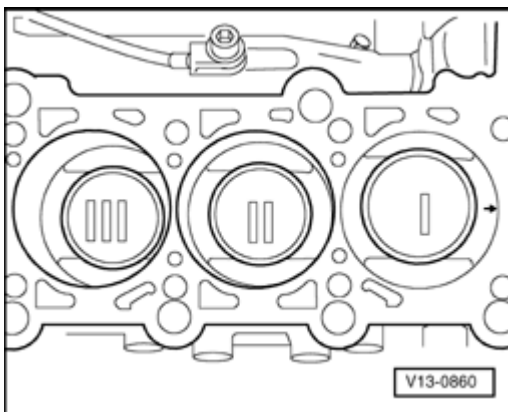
Installed Position Of Piston And Piston/Cylinder Allocation
